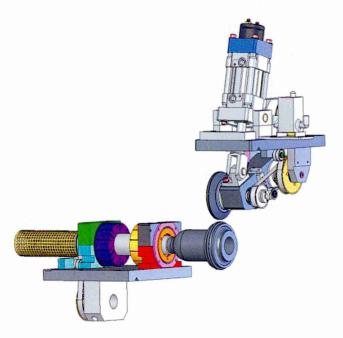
Continuous Ultrasonic Welding Equipment (Mecasonic 2013).
